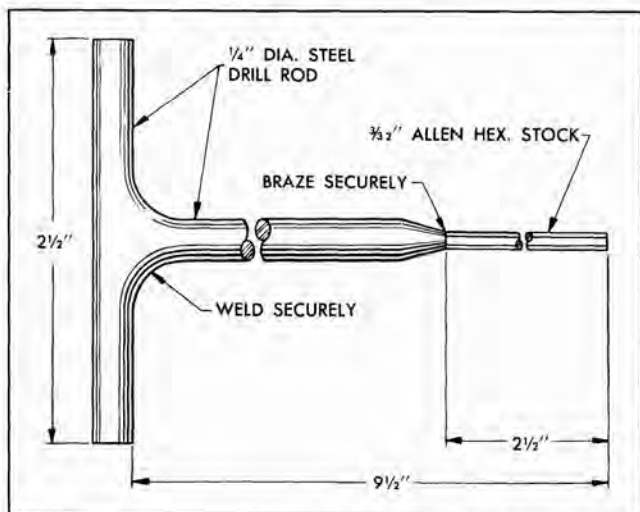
Air Inlet Valve Link Adjusting Tool
